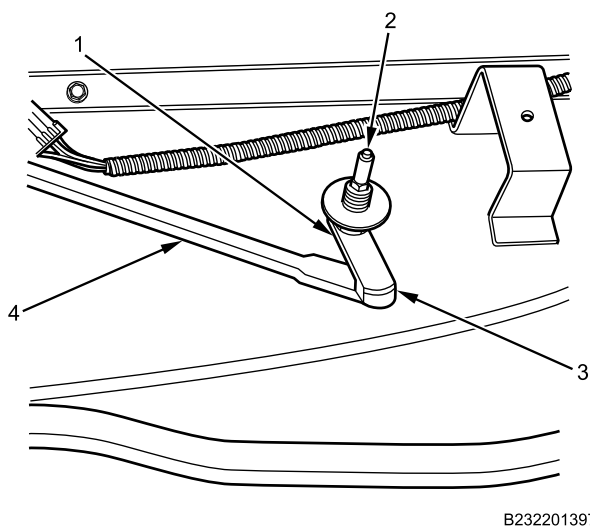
Windshield Wiper Linkage and Idler Shaft Alignment.
